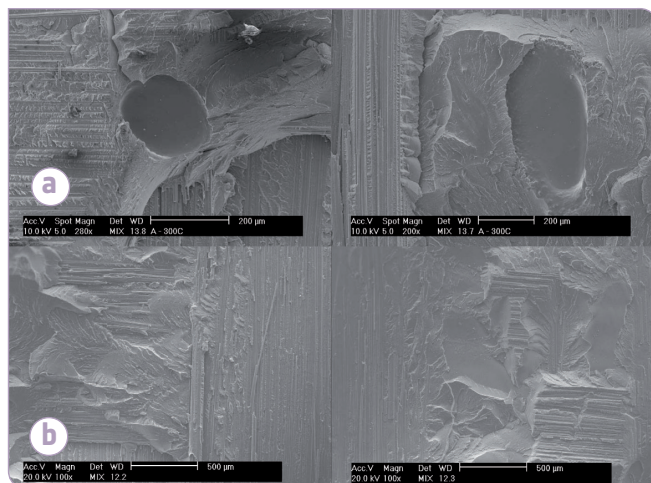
SEM observation of the fracture surfaces (a) One-sided welding, cavities present (b) Two-sided welding, no cavities present.
